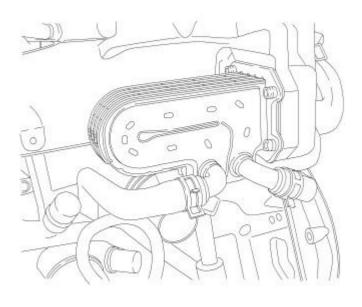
AIR TUBE - EGR AIR VALVE Courtesy of CHRYSLER LLC
